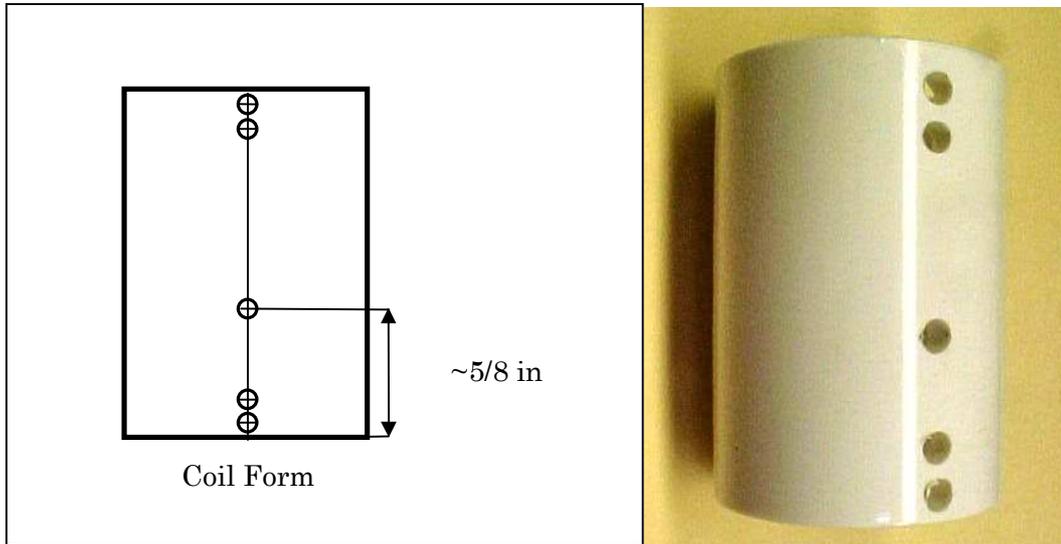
Details of the coil Form. Drill a total of 5 holes, hole size is approximately 1/8 inch diameter as shown.
